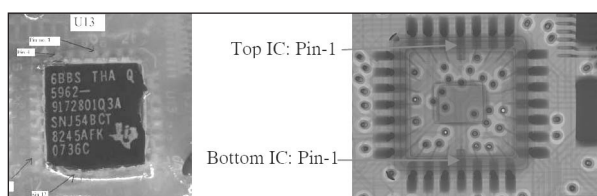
IC mounted on a 6-layer PCB (left) and its 2D x-ray image (right) showing two ICs mounted back-to-back on top and bottom layer of the PCB.
